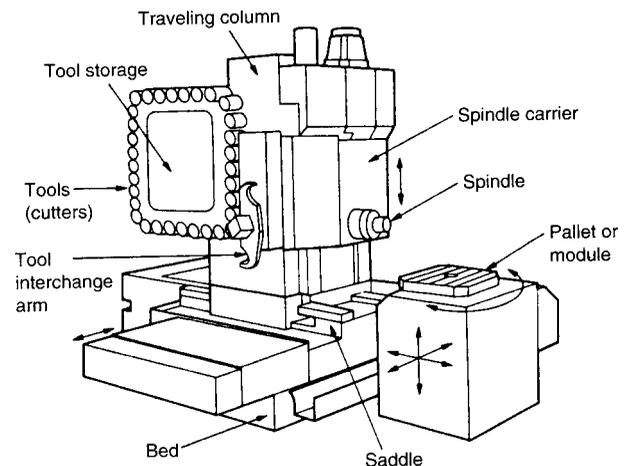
Schematic of a horizontal spindle machining center, equipped with an automatic tool changer. Tool magazines can store 200 different cutting tools.
